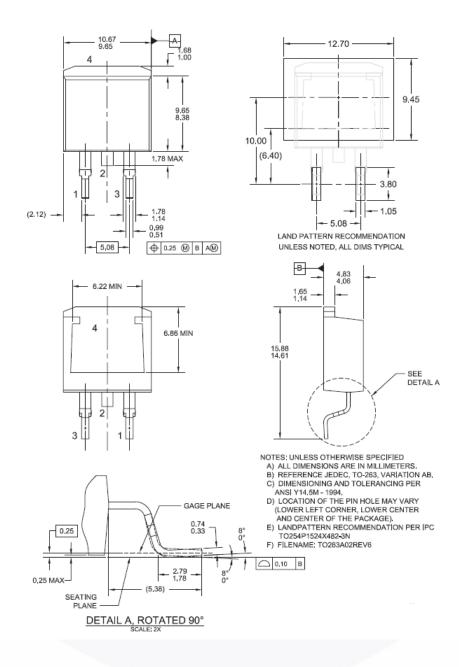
TO263 (D<sup>2</sup>PAK), Molded, 2-Lead, Surface Mount
